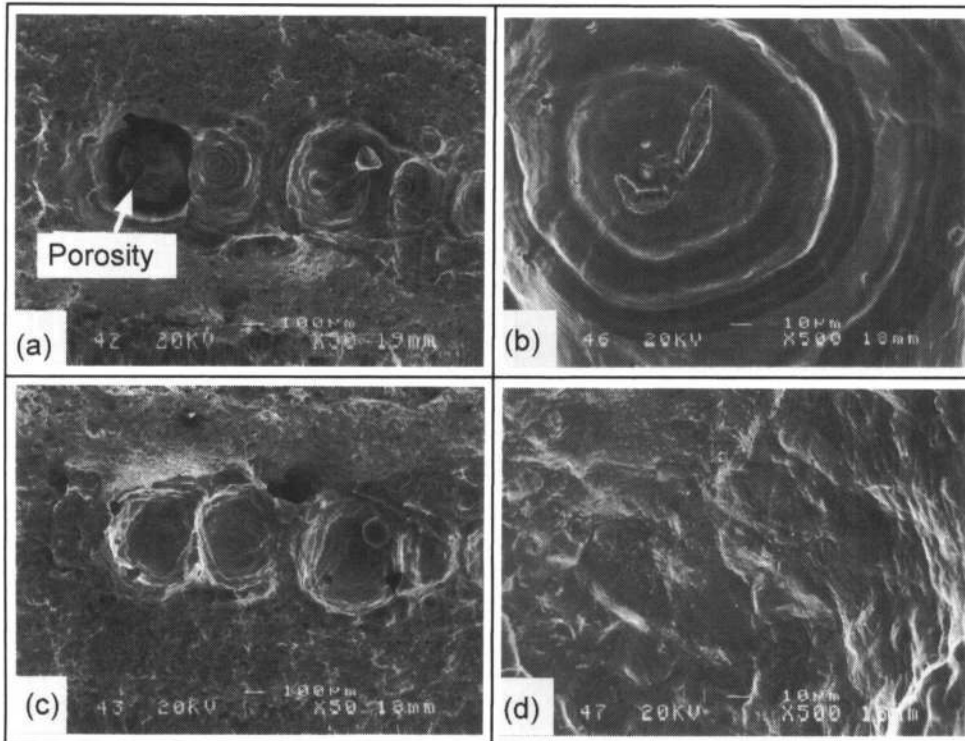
SEM photos of fractured surfaces [(a), (c)] and porosity surface [(b), (d)] in Type 304 laser weld bead produced at 10 kW in He gas.
